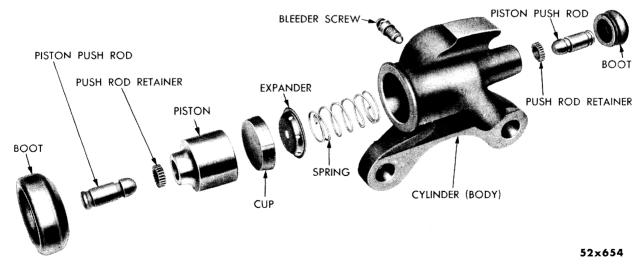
Front Wheel Brake Cylinder (Disassembled View)
